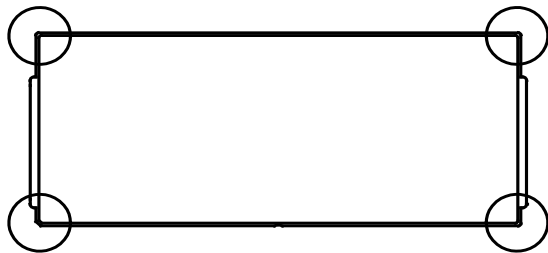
Top view of a tray showing the measurement locations for the outline dimensions
